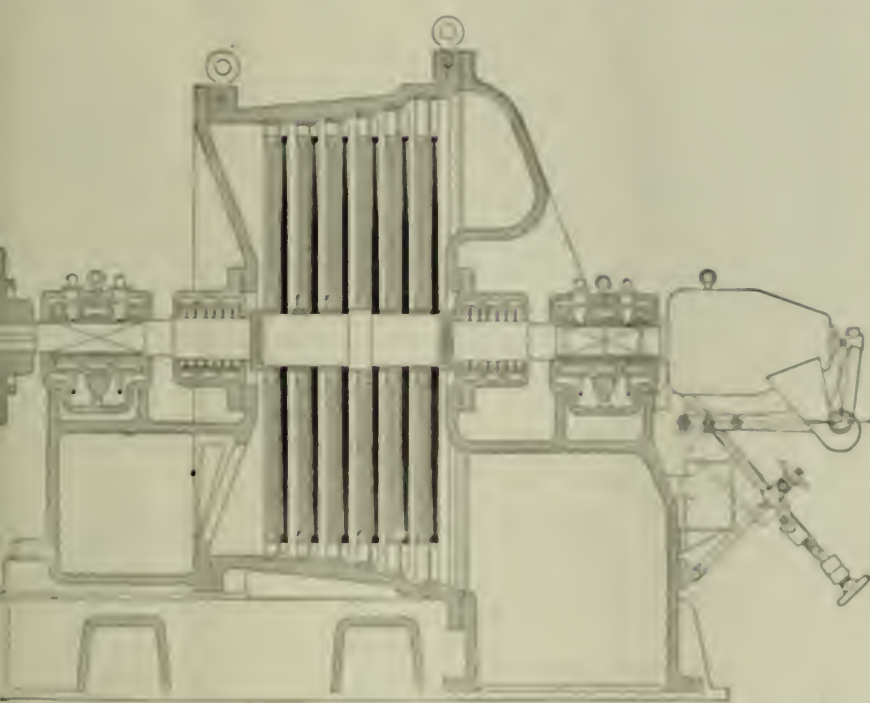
CROSS-SECTION OF RAPER-SHOOT TWO-ROWED STEAM PRESSURE TURBINE
